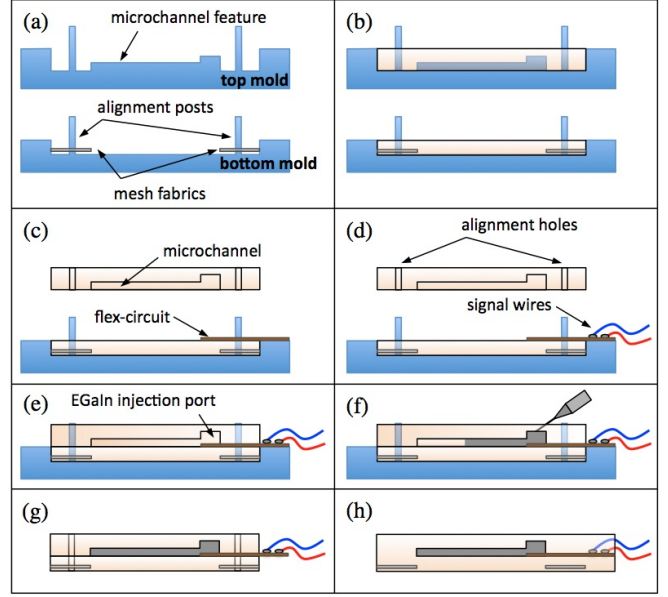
Soft sensor fabrication process. (a) Prepare molds (3D printed) and mesh fabrics. (b) Pour liquid silicone. (c) Remove top mold and place flex-circuit on the bottom layer with alignment. (d) Solder signal wires on the flex-circuit. (e) Bond the top layer to the bottom layer. (f) Inject EGaIn. (g) Remove bottom mold. (h) Final sealing for wire protection.
